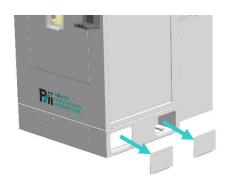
Removing left and right access panels to access 4 hex bolts and washers securing charger to pallet
